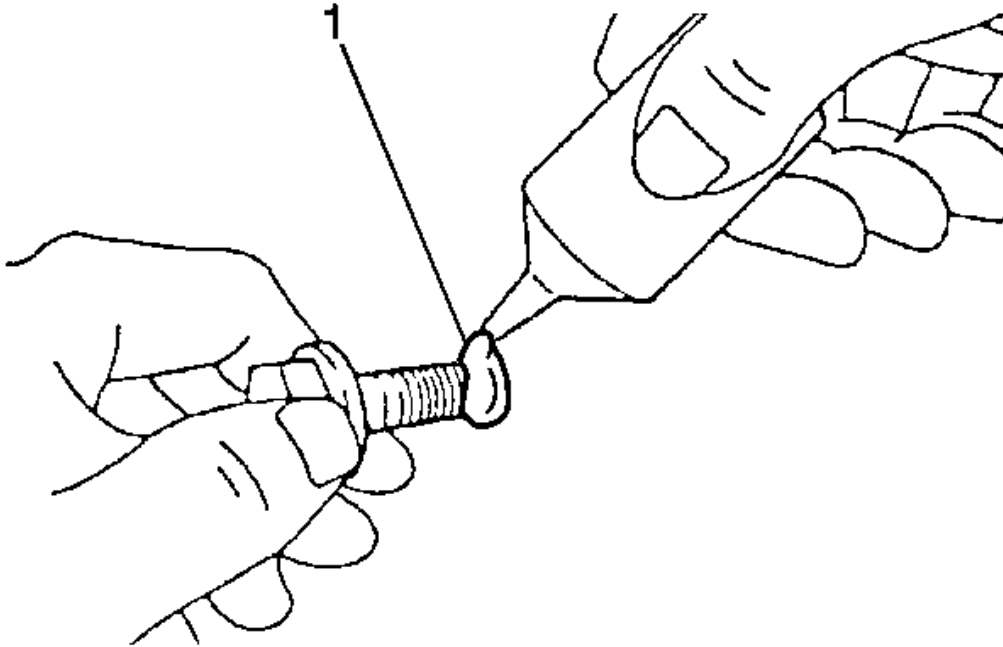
Applying Sealant To Flywheel Retaining Bolt Threads
